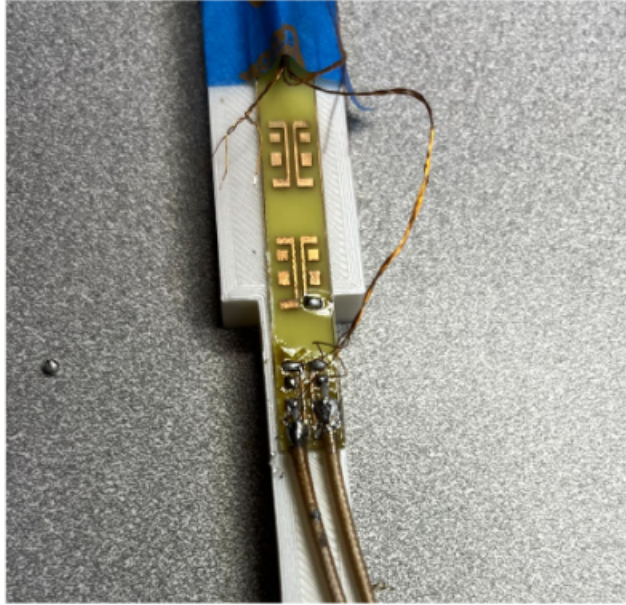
Example for how wires should be soldered to board (old circuit board design shown here)
